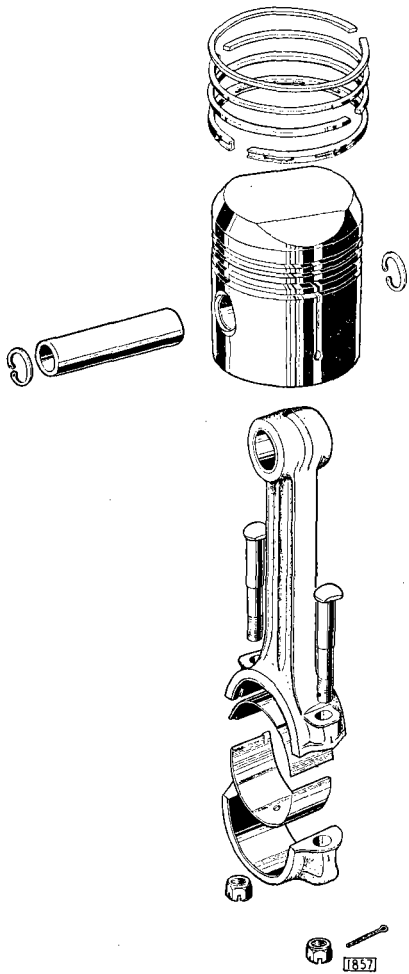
Exploded view of piston and connecting rod (2.4 litre illustrated).
